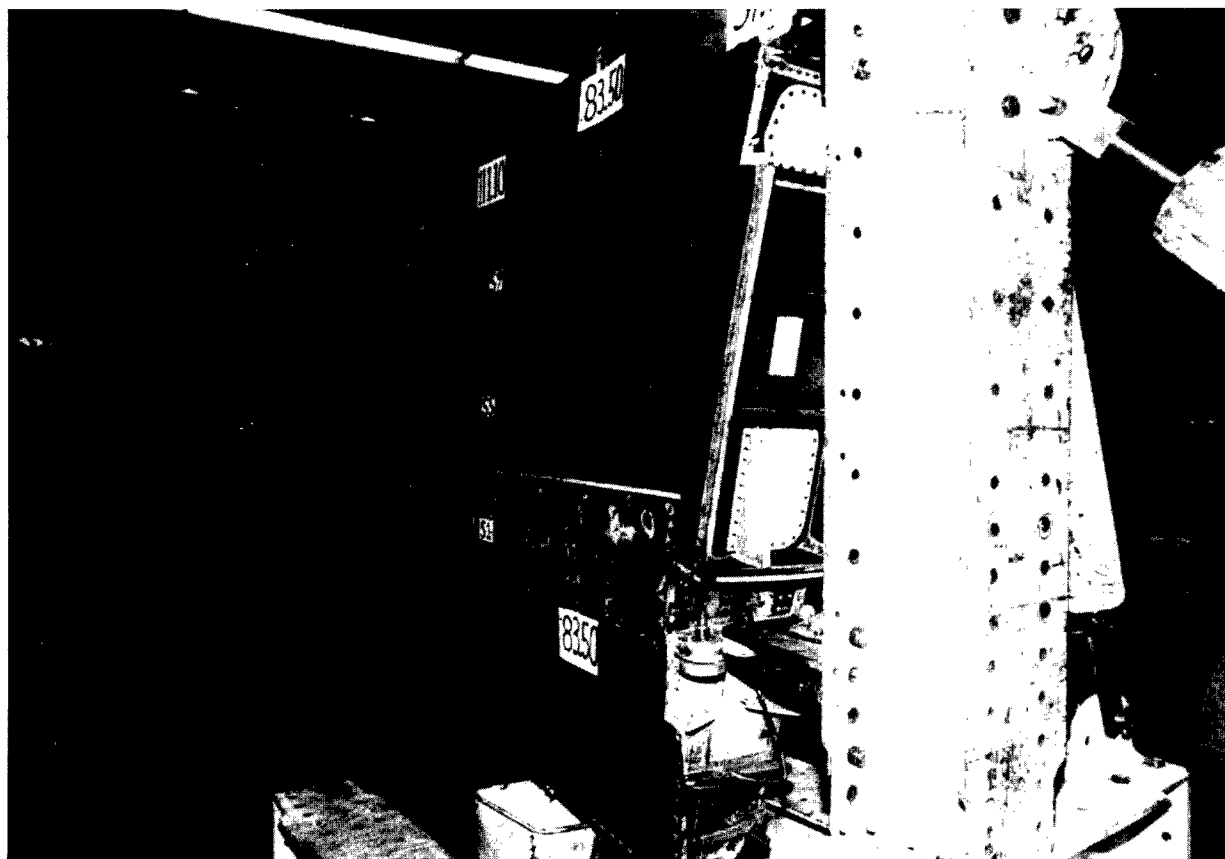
A. Stabilizer Mounted for Inspection, Upper Surface
